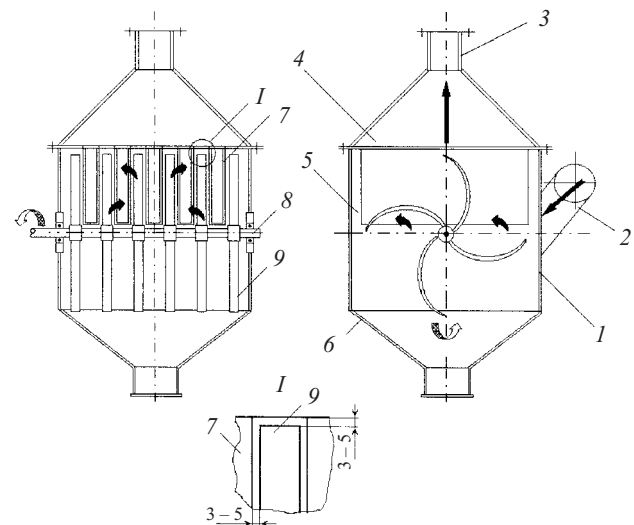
Aerodynamic recovery filter: 1) casing; 2) inlet header; 3) outlet pipe; 4) treated gas chamber; 5) dust-laden gas chamber; 6) dust bin; 7) filter cells; 8) shaft with impellers; 9) impeller blade.
